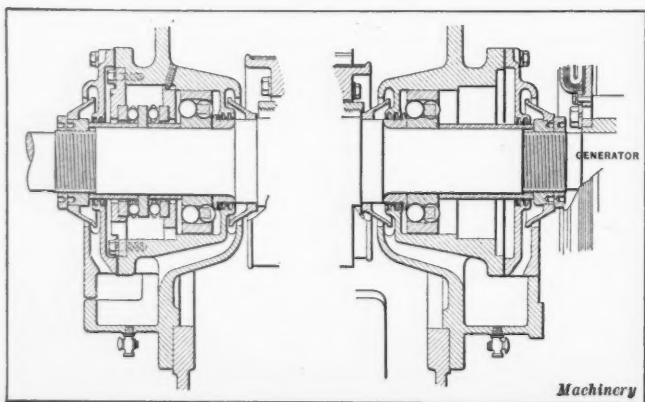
Diagram showing Mounting of Motor-generator Sets
